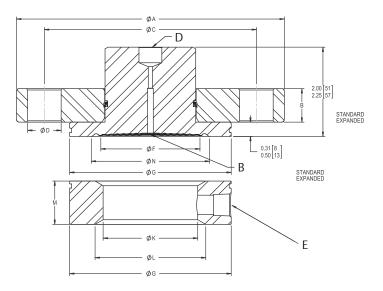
FFW Flush Flanged Seal - Two-Piece Design (Shown with Flushing Ring)
